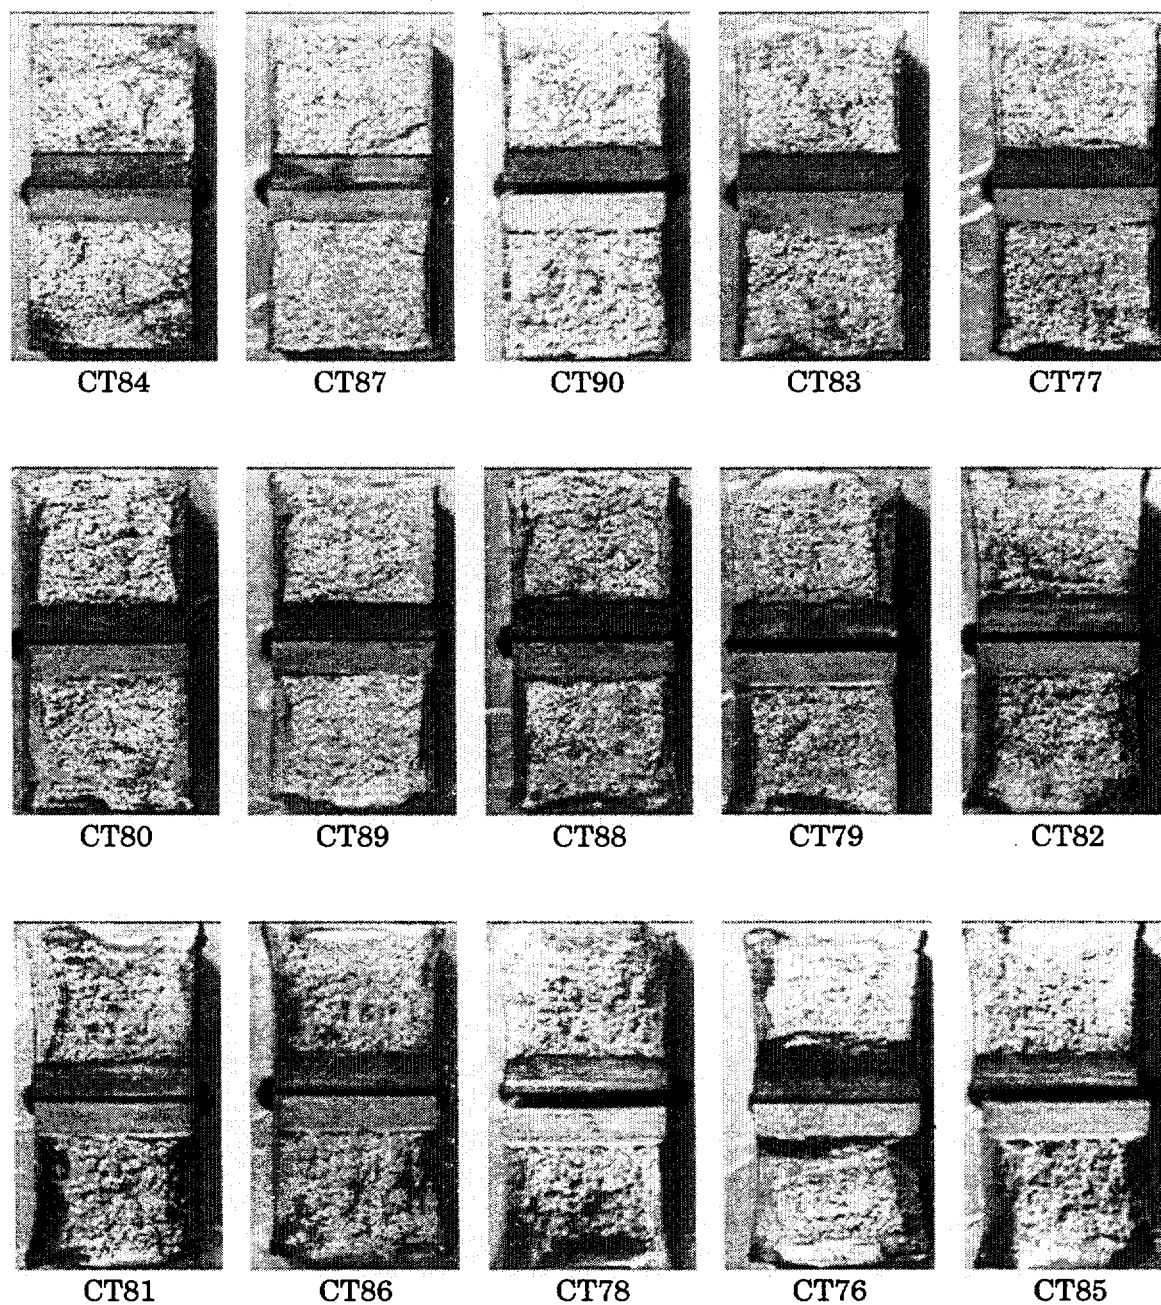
Charpy Impact Specimen Fracture Surfaces for J. M. Farley Unit 2 Reactor Vessel Intermediate Shell Plate B7212-1 (Transverse Orientation)
